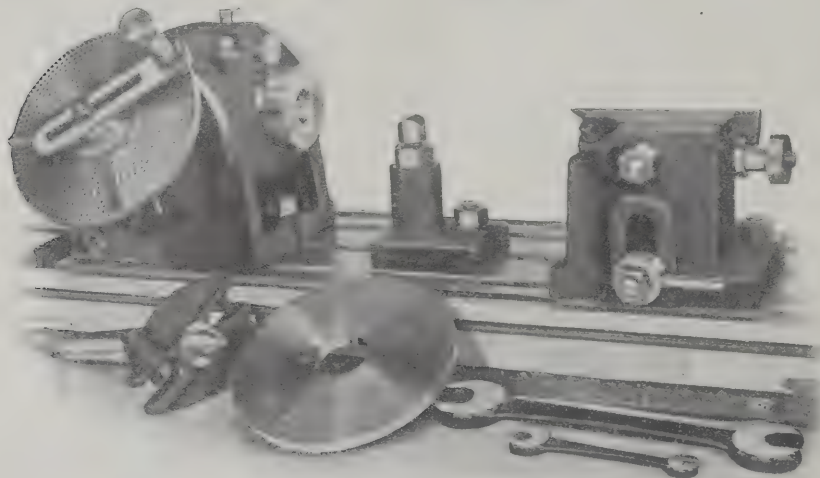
New Type of Universal Dividing Head, brought out by the Kempsmith Manufacturing Co., Milwaukee, Wis.
